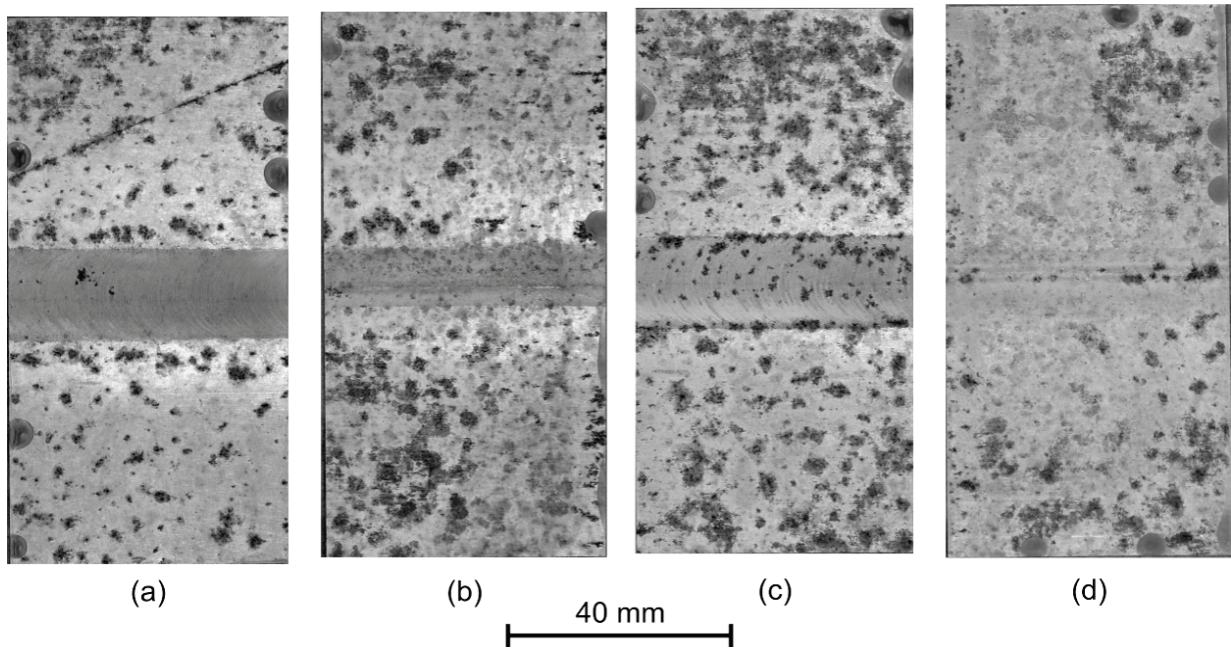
Surface appearance of FSW 6056 joints after cyclic exposure to a salt spray solution according to ASTM G85-85 A2: (a) FSW 6056 –T6 face side, (b) FSW 6056-T6 root side (c) FSW 6056-T7X face side, (d) FSW 6056-T7X root side
